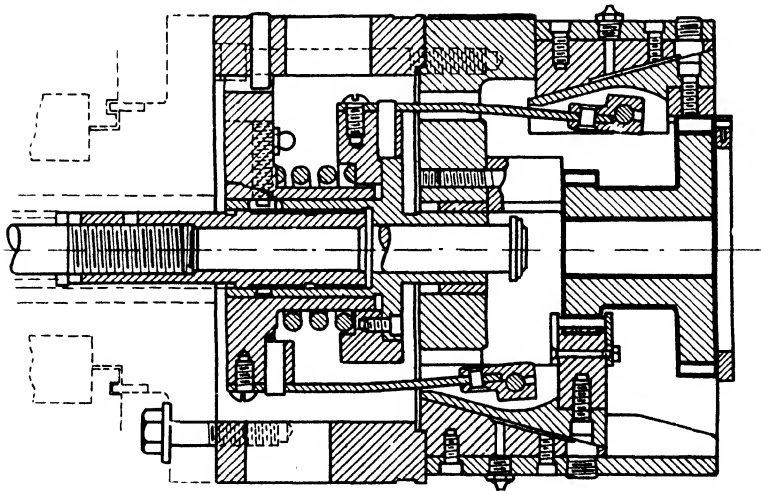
Double chuck which centers both gears by rollers on pitch line.
